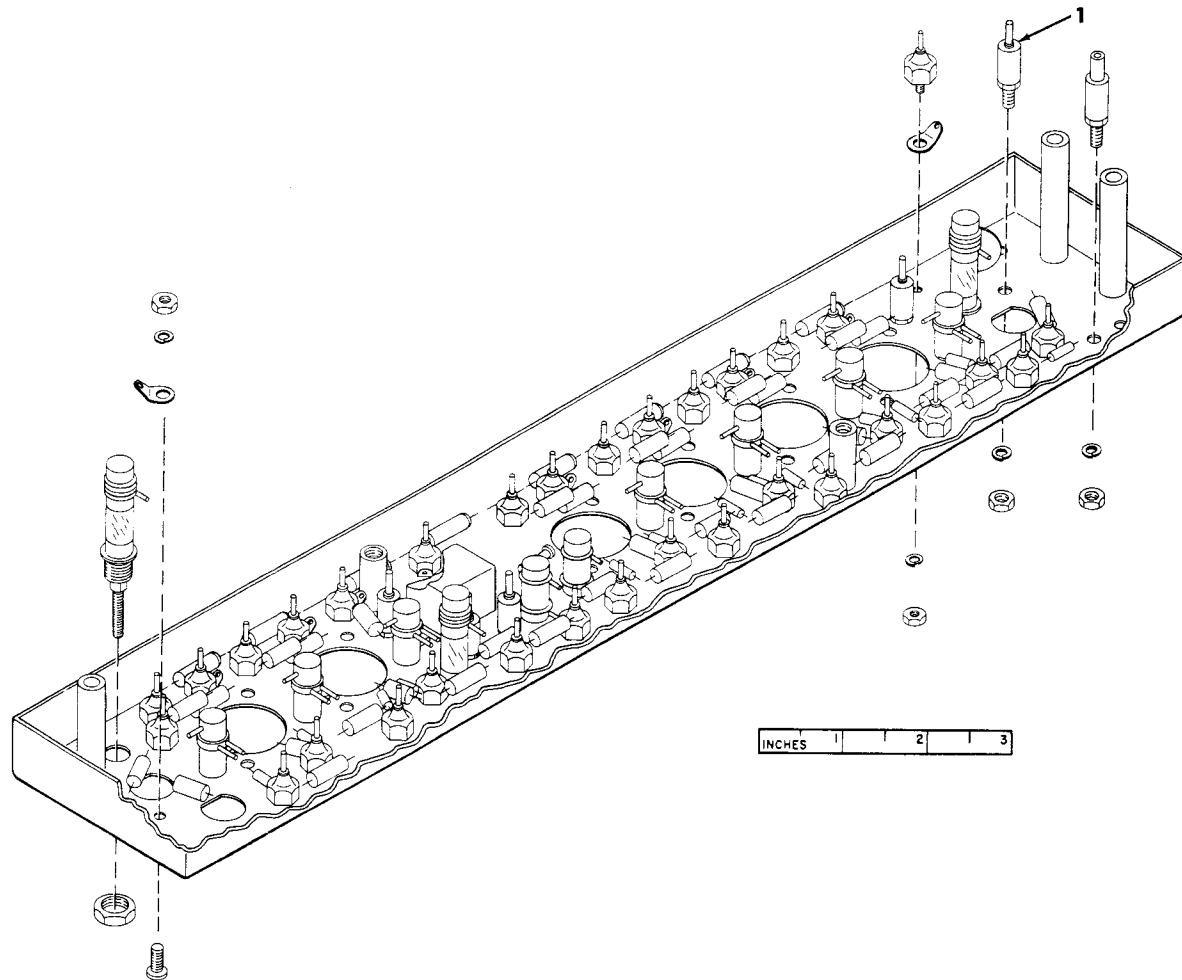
Control, electrical frequency (9009464)—partial exploded view
